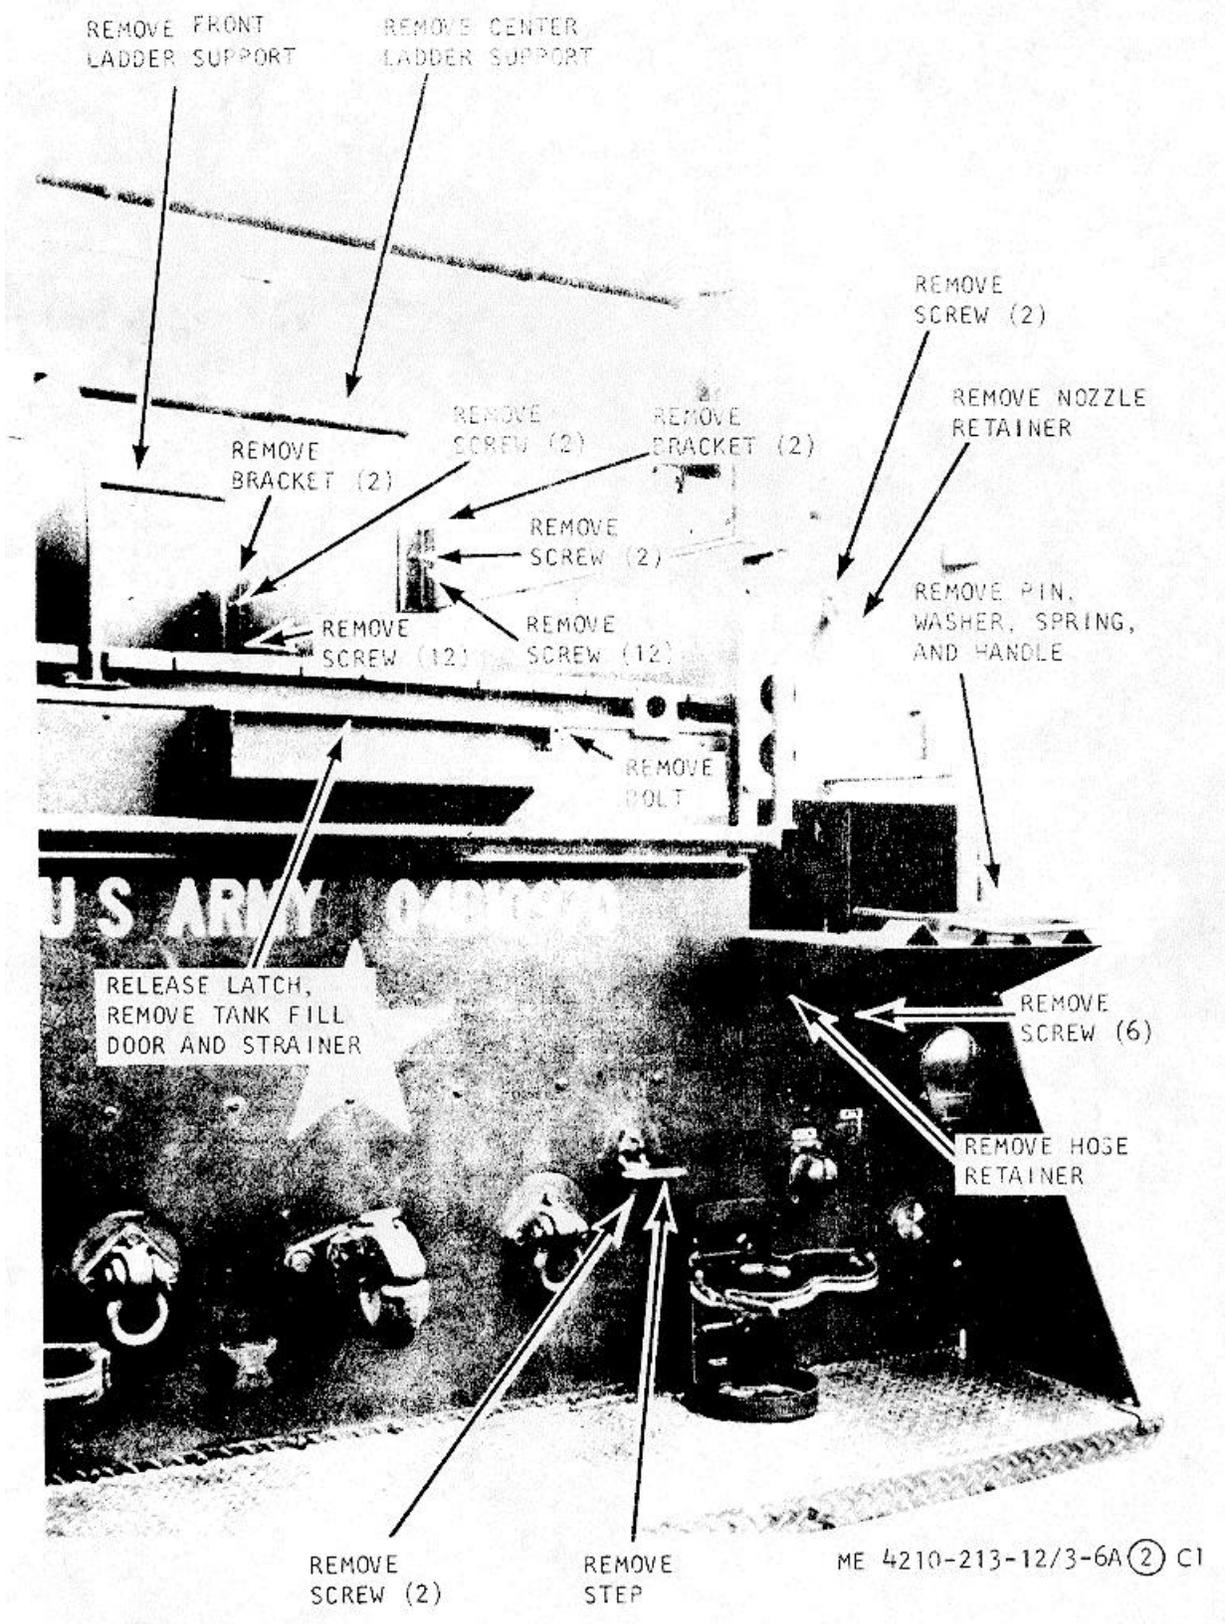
A. Ladder support assemblies, retainers, and fill door removal and installation for model FT-500 (sheet 2 of 2)
